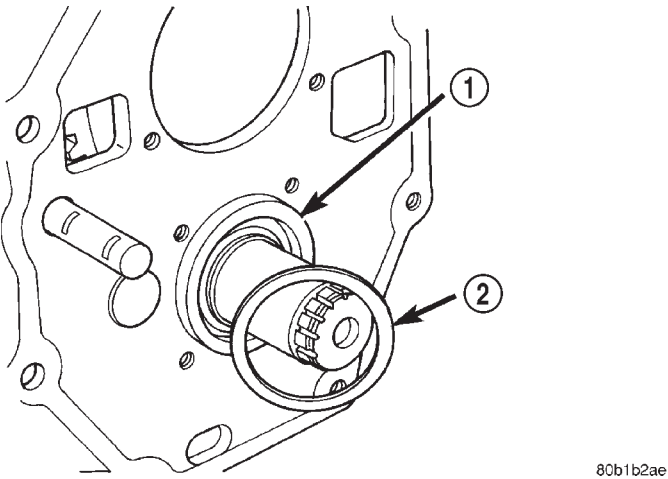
Countershaft End Play Shim And Rear Bearing Cup
